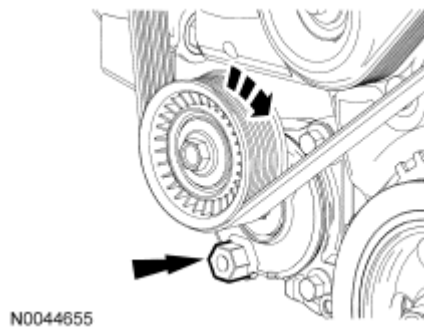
Rotating Accessory Drive Belt Tensioner Clockwise
